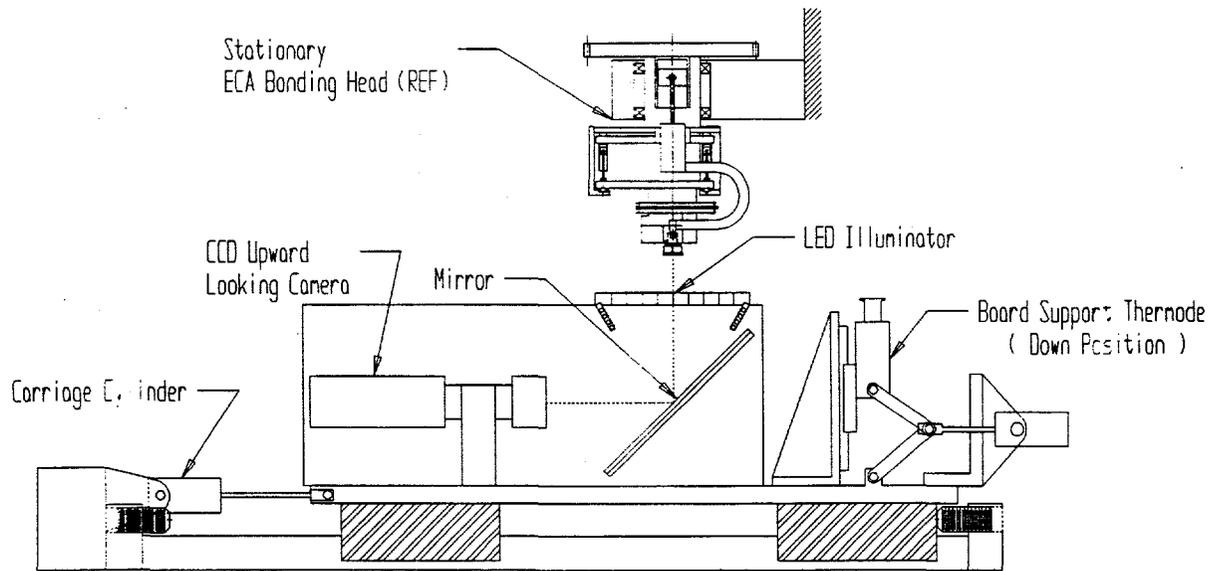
(a): The lower camera and board support subsystem in position to view a chip component on the bond head.
